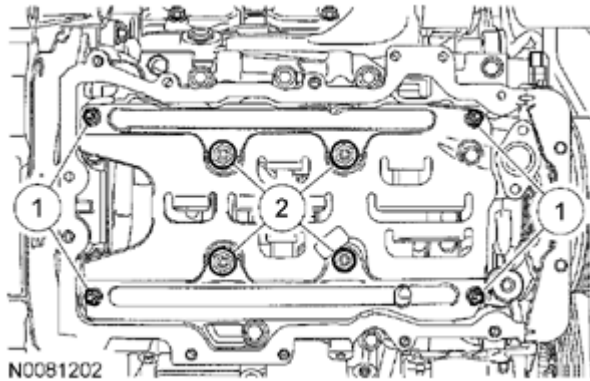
Identifying M6 And M8 Oil Pan Baffle Nuts
